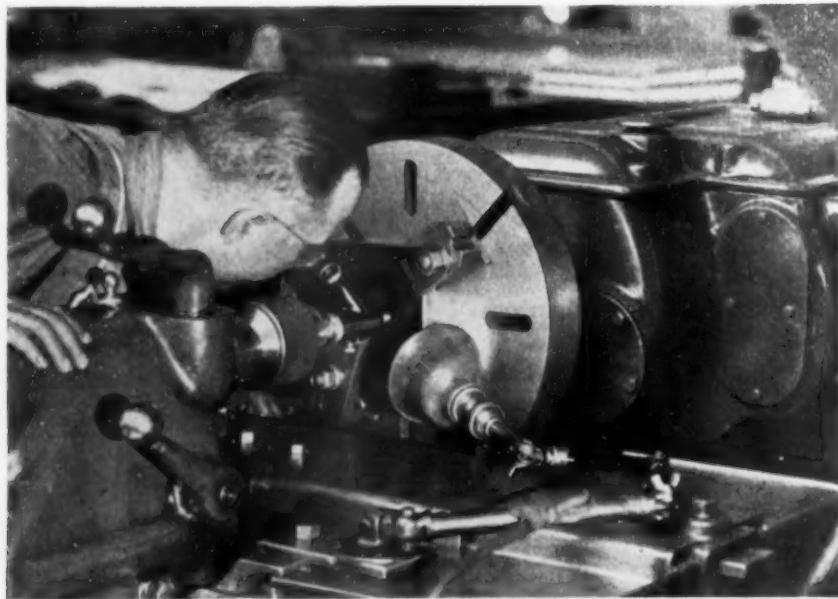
The Center Scope is used for locating to bore holes in a jig plate. Scribed lines are used in this instance, with surface plate and size blocks. (See fig. 20 for working drawing.)
